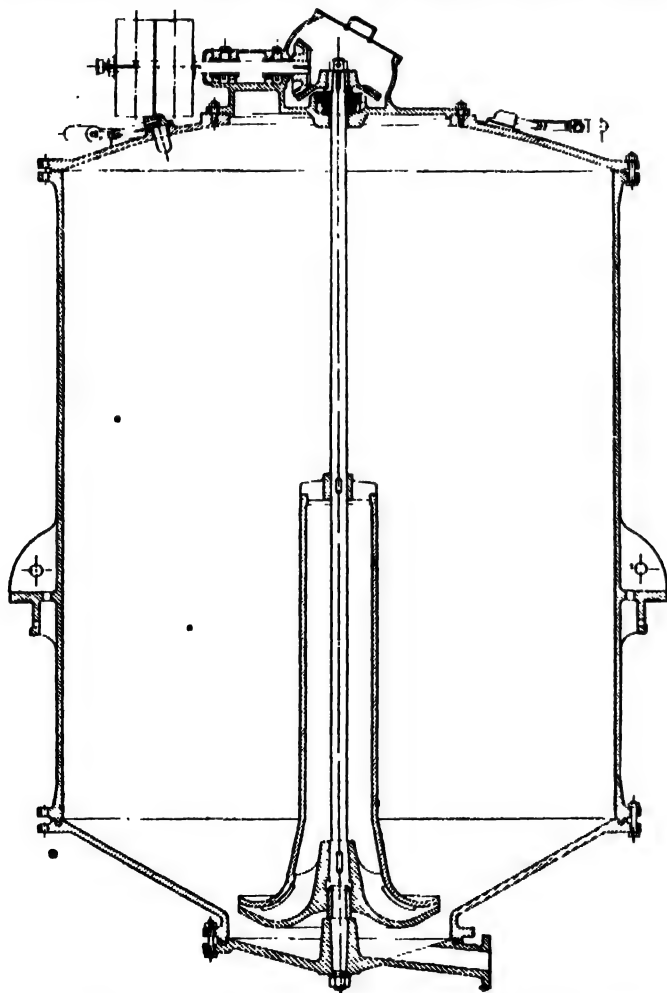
TURBINE IMPELLER AGITATOR AT BASE
